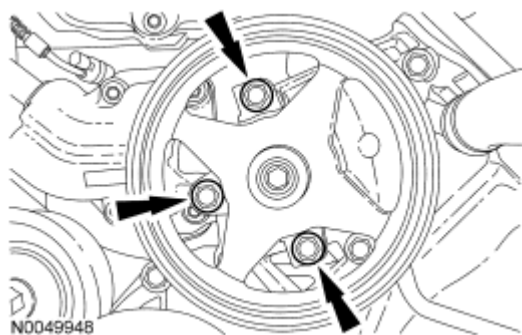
Locating Power Steering Pump & Reservoir Assembly Bolts
